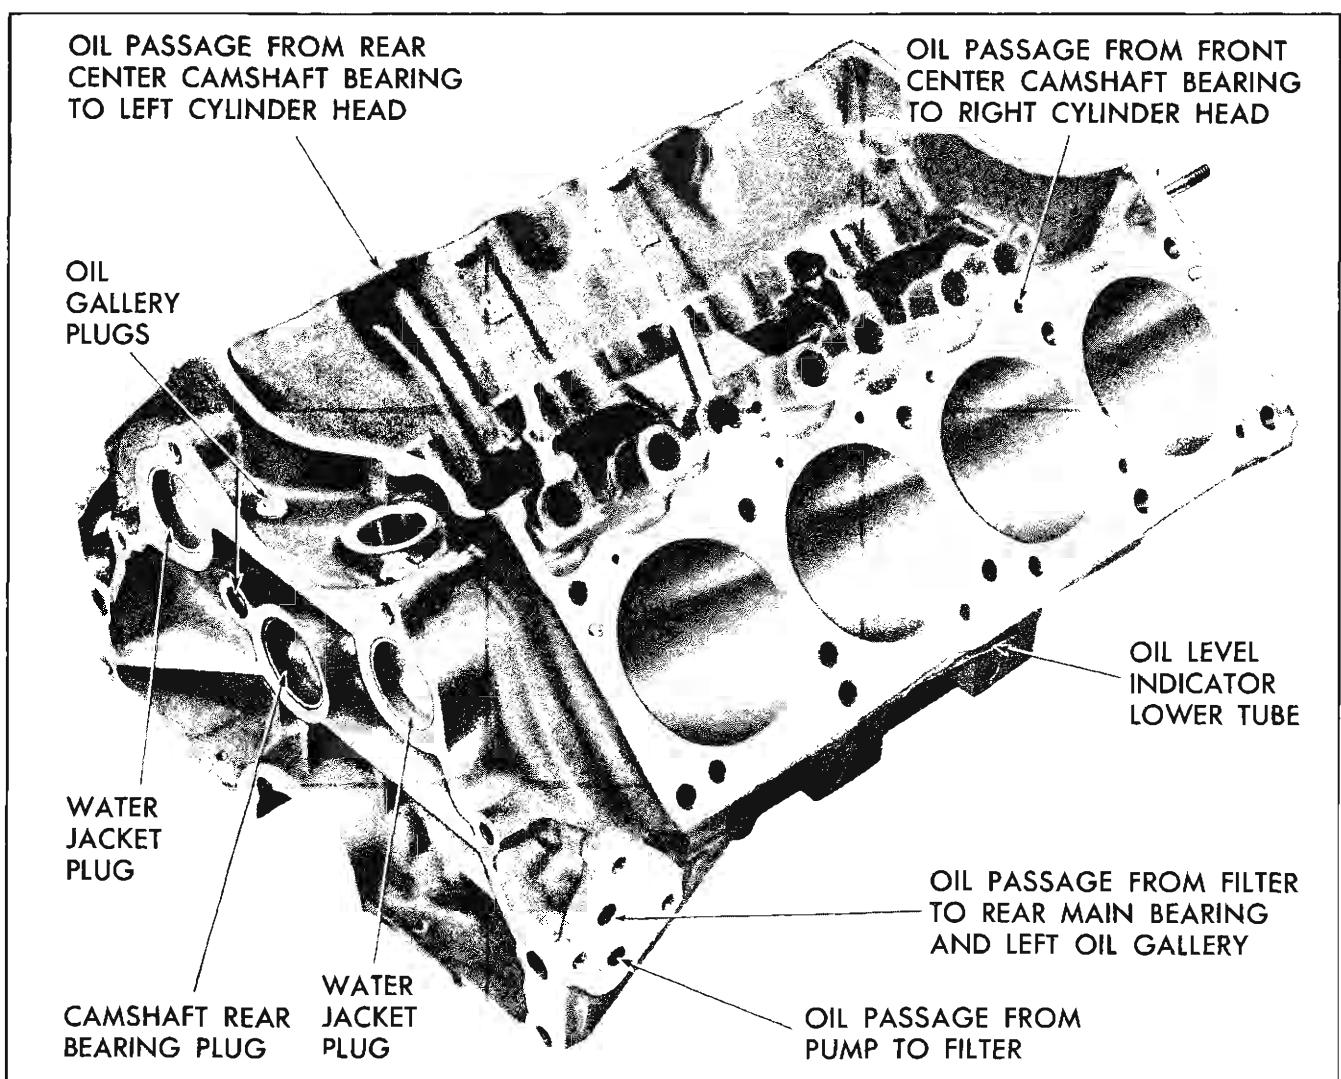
Cylinder Block—View from Right Rear—V-8 Engine
